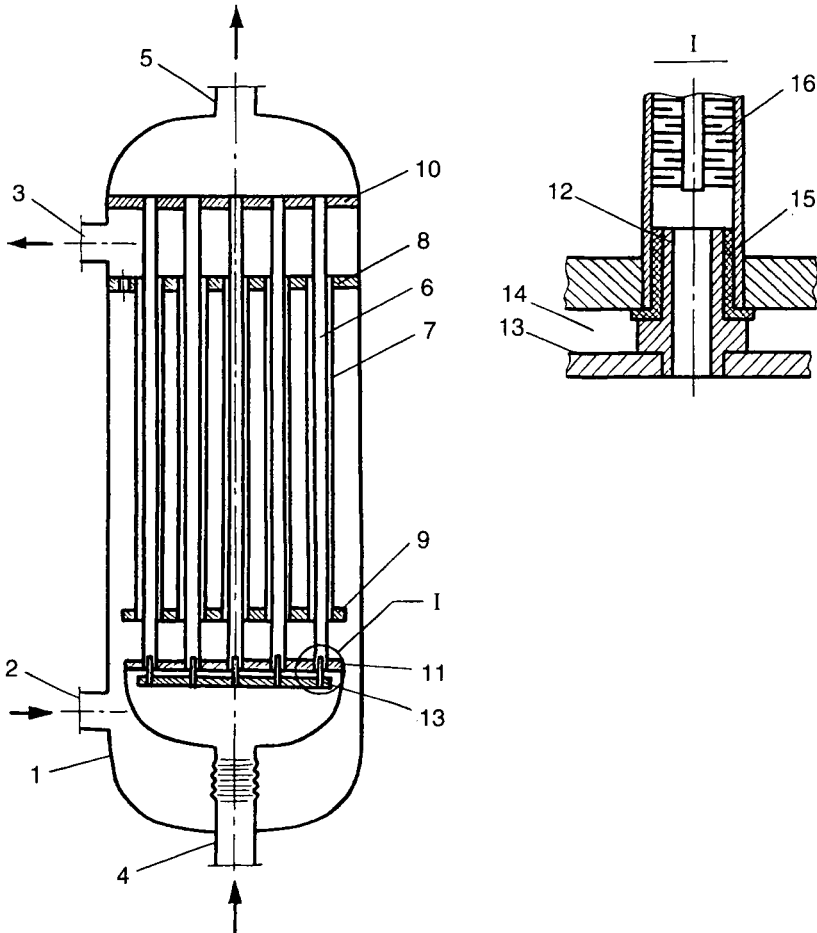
Type IG-30 gasifier: (1) casing, (2) inlet of heated fluid, (3) outlet of heated fluid, (4) inlet of cryogenic liquid, (5) outlet of produced gas, (6) inner tubes, (7) outer tubes, (8, 9) upper and lower tube sheets for outer tubes, (10, 11) upper and lower tube sheets for inner tubes, (12) branch pipe, (13) additional tube sheet, (14) clearance, (15) insulation, (16) corrugated fin insert (Dyachuk 1991).
